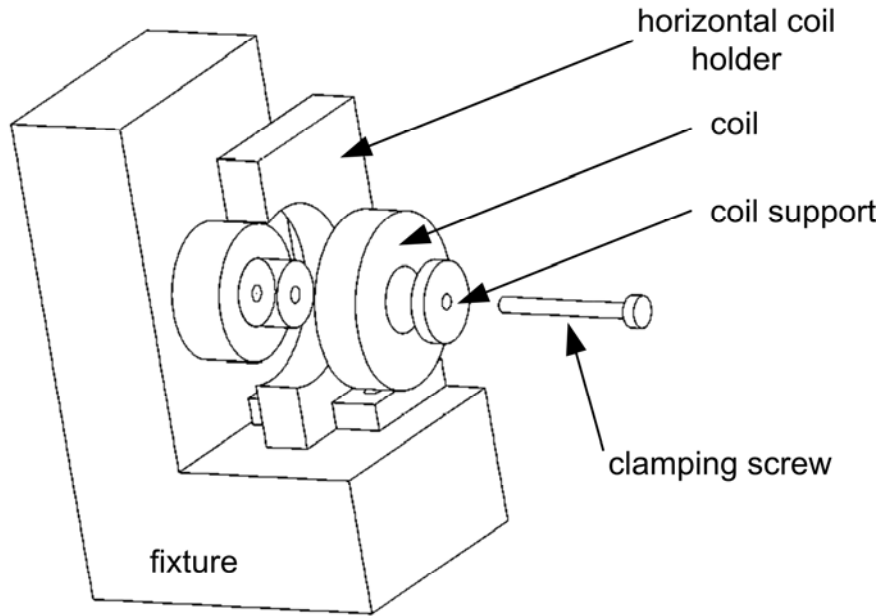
Tooling for gluing horizontal coil to the coil holder.
